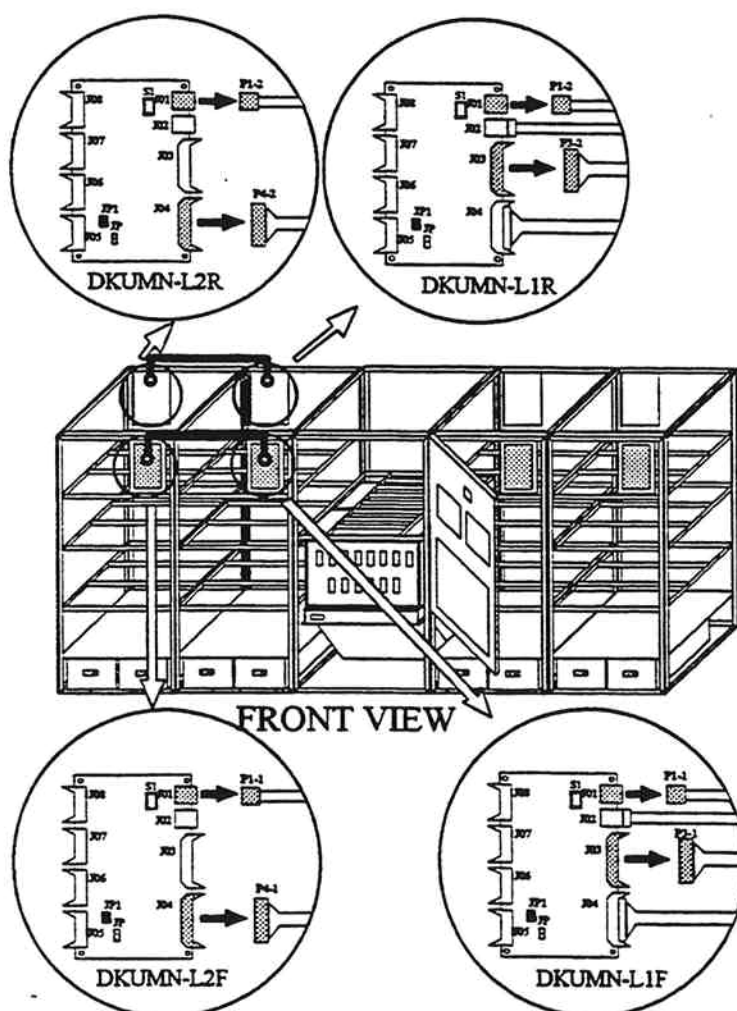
Connection of DKUMN Cables
